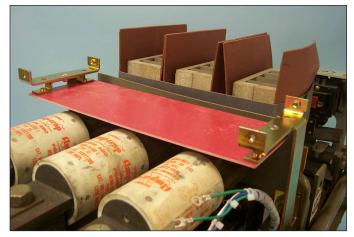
Bottom Aux. CT Module Insulation Barrier Assembly Installed on the Aux. CT Module Mounting Brackets.
